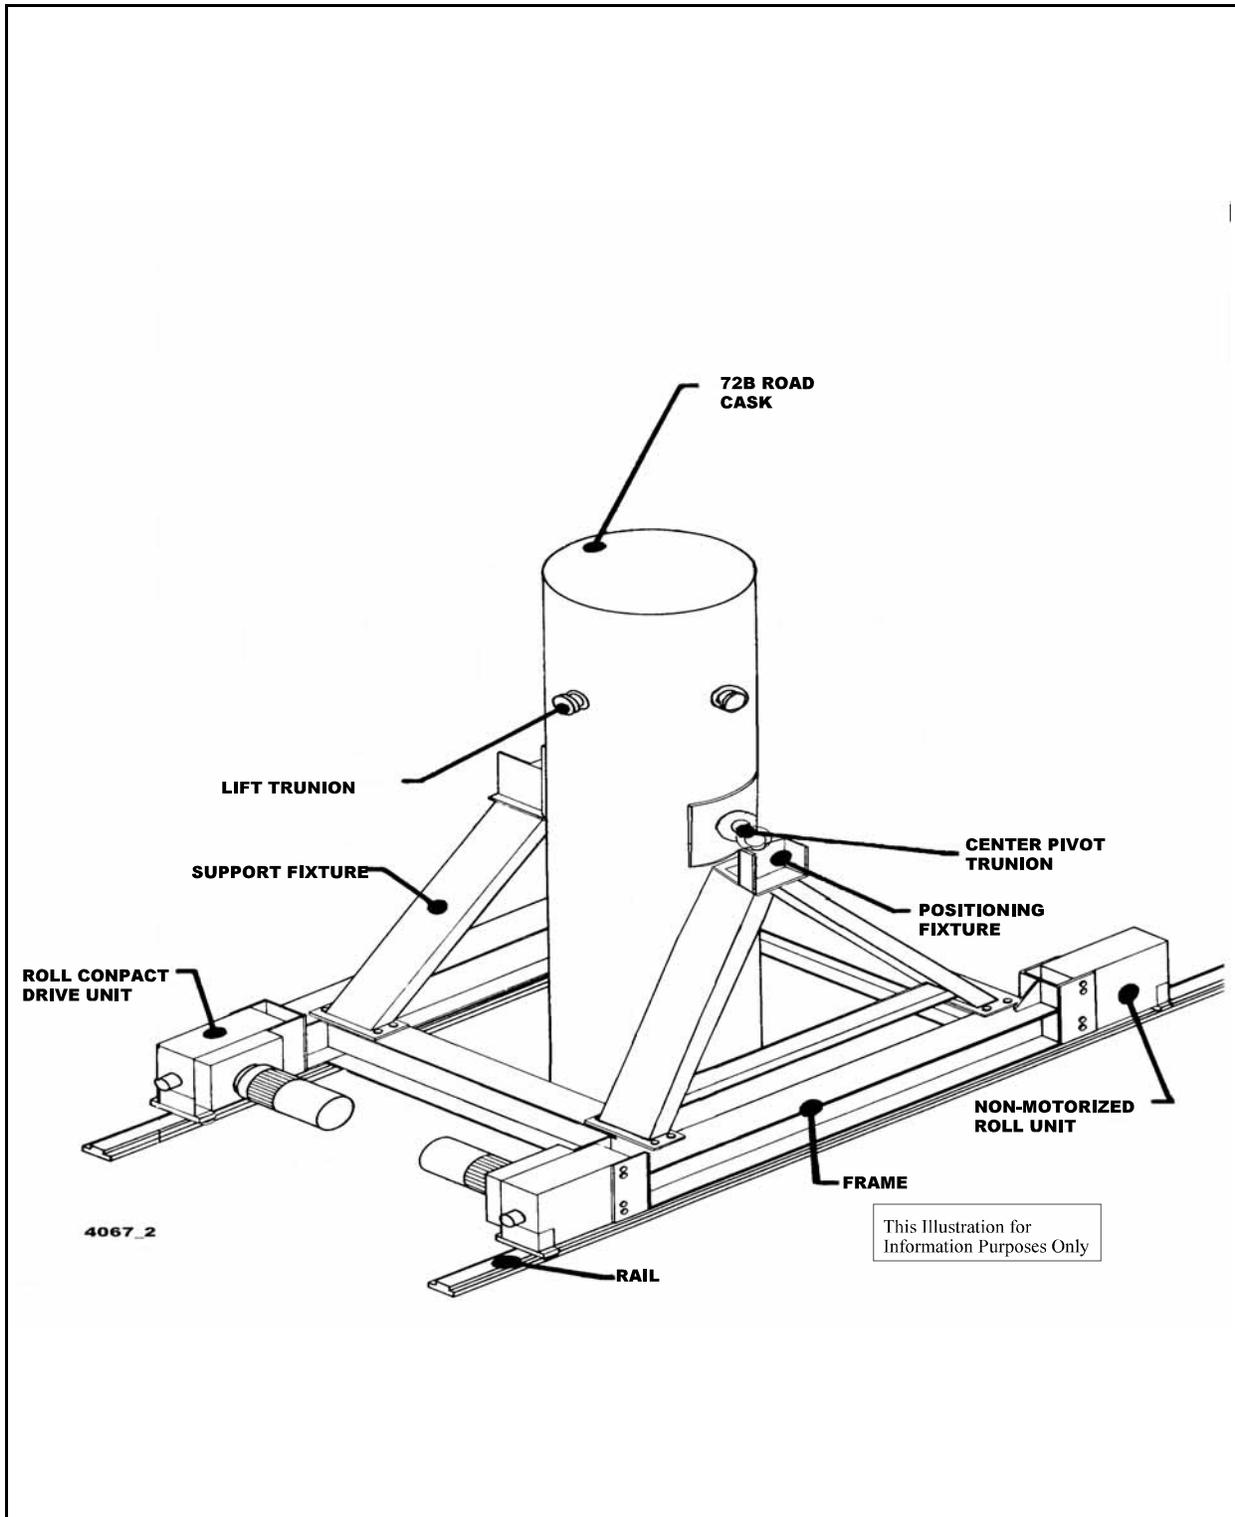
, 72-B Shipping Cask on Transfer Car
